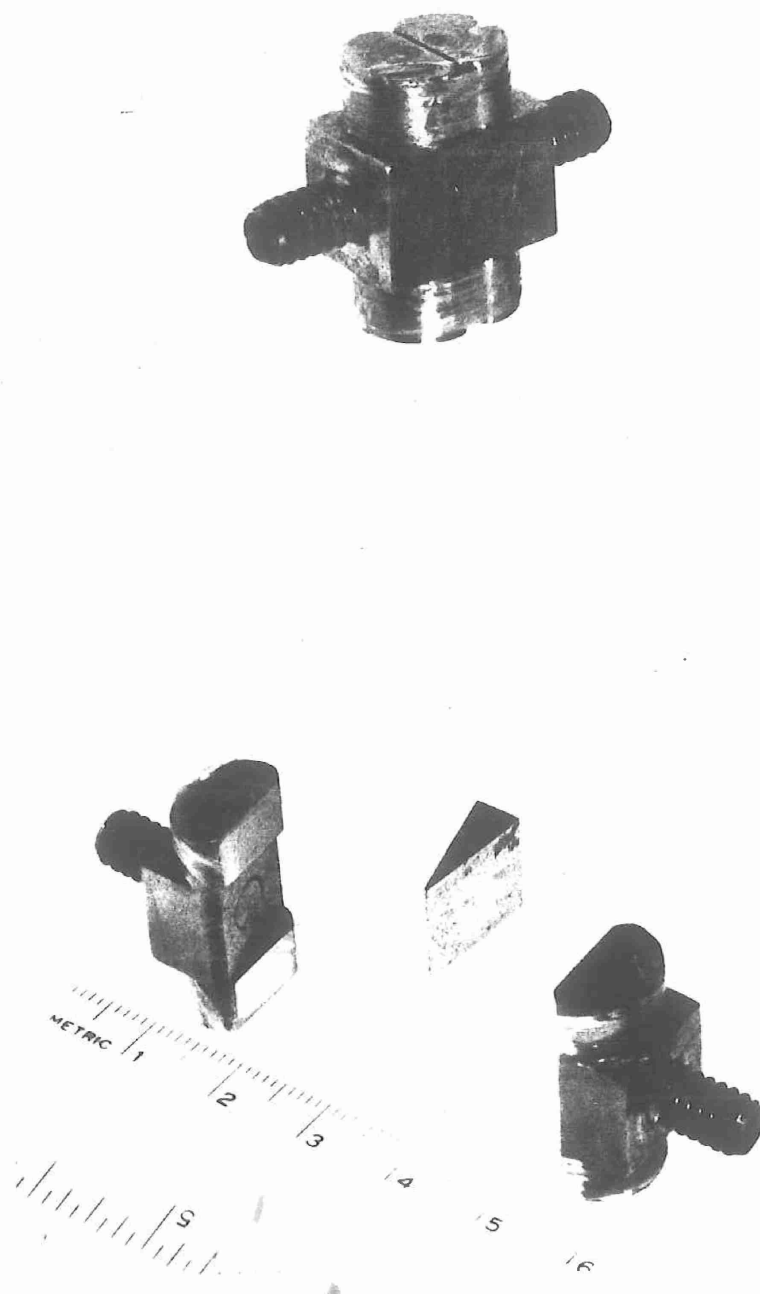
(a) Photographs of specimen design Type A (with a wedge) showing the fiber failure after test.
